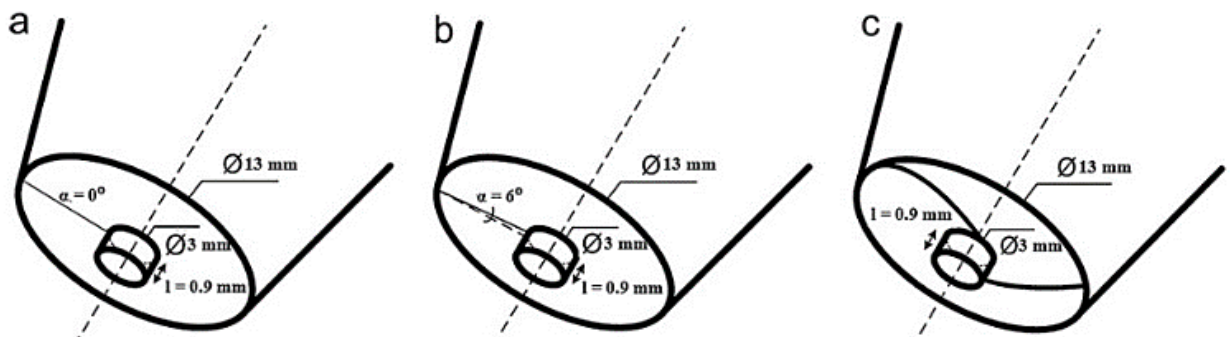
Tool shoulder geometries, (a) flat, (b) conical concave and, (c) scrolled [37].
